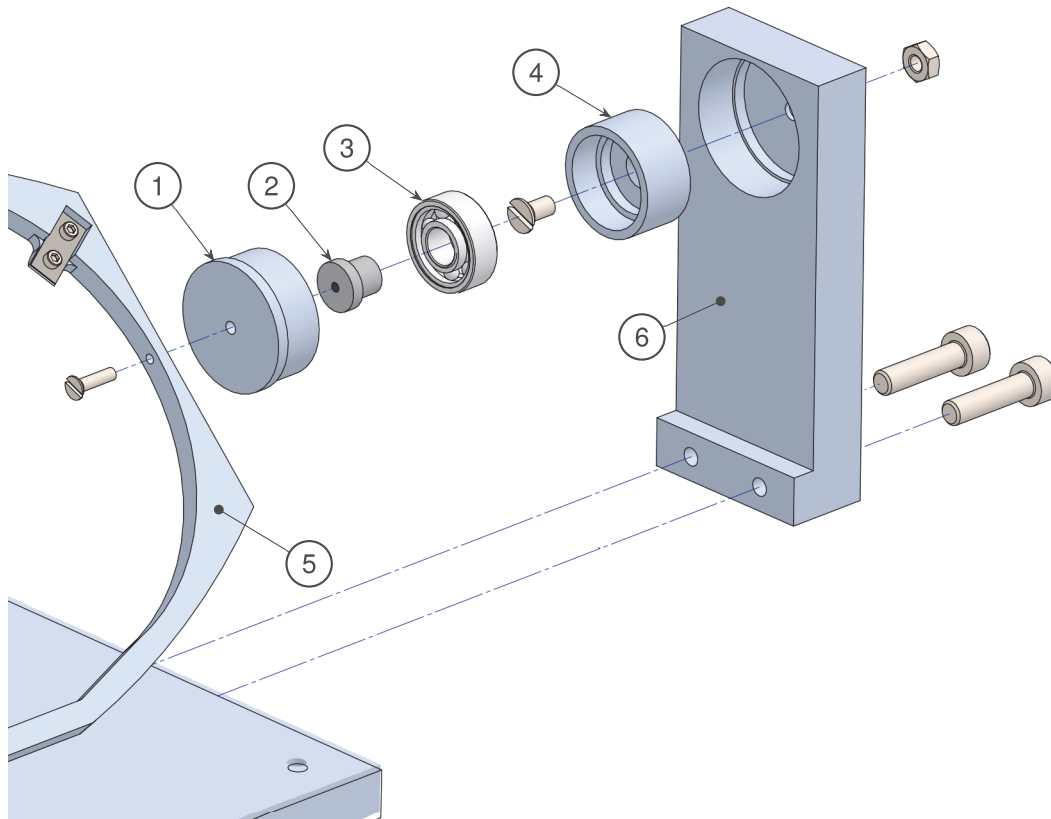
Exploded view of a ceramic ball bearing assembly. The design of this subsystem prevent deposition of material inside the bearing.
